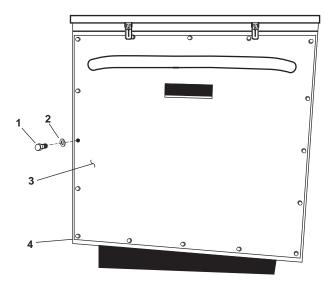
Towing Machine Control Panel (Operator ) Rear Panel
